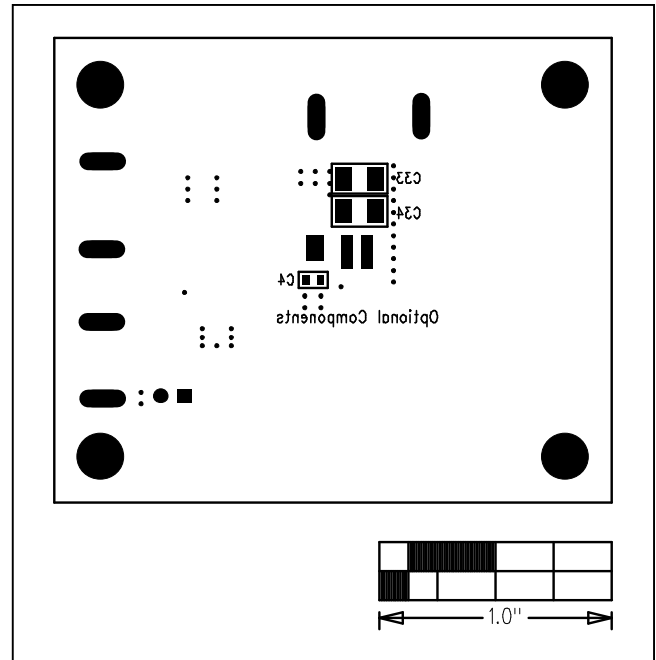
MAXM17514 EV Kit Component Placement Guide—Solder Side
